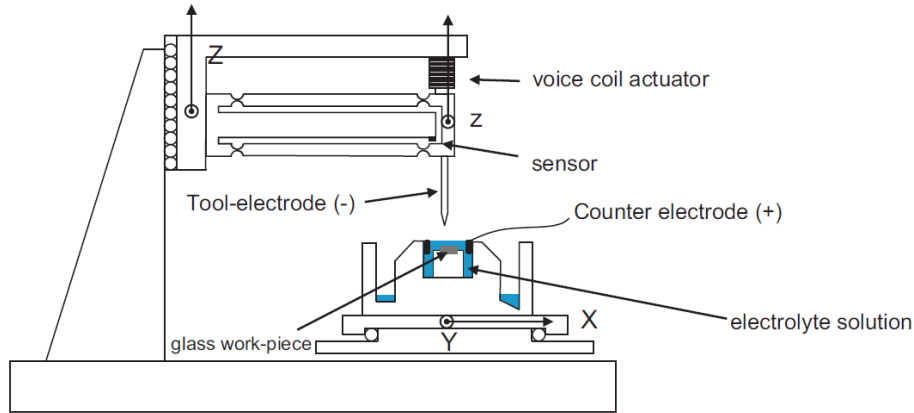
Schematic of a conventional SACE set-up. An XYZ Cartesian robot embodies a machining head (that holds the tool) and a processing cell containing the workpiece. Reprinted from the work in [22] with permission from Elsevier
